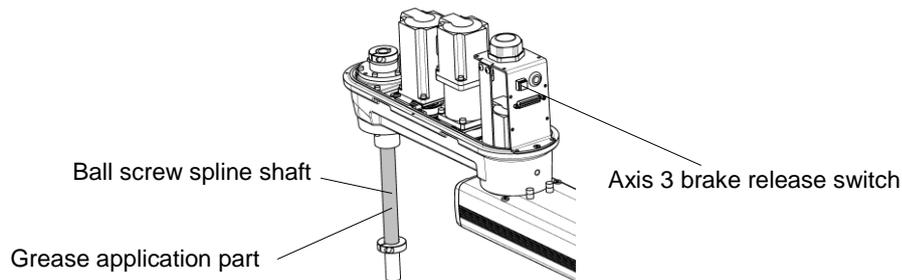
Greasing up the ball screw spline unit (lower side)
